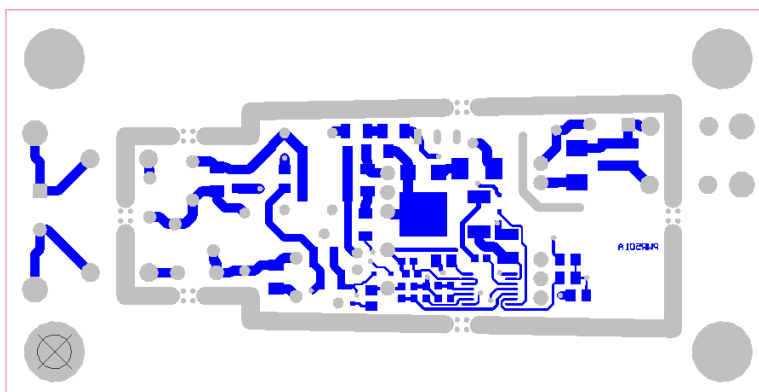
LM3447-PAR-230VEVM Bottom Layer Copper (bottom view)
